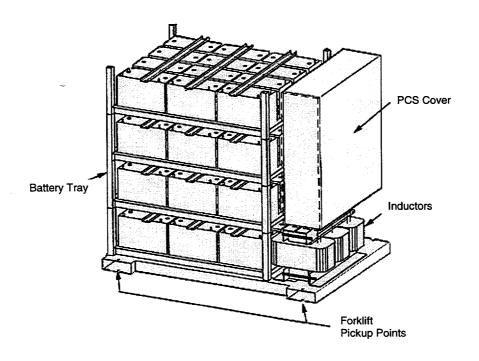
Module Showing PCS Mounted with Redesigned Battery Trays.
